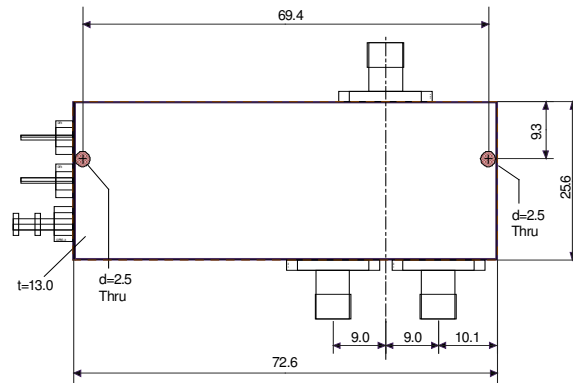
Mechanical configuration, milled aluminium enclosure, feedthru pins, ground pin, mounting holes, SMA (f) ports
